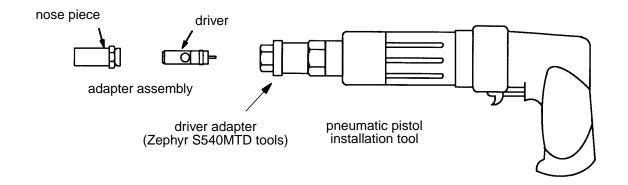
Pneumatic Installation Tool and Adapter Assembly
